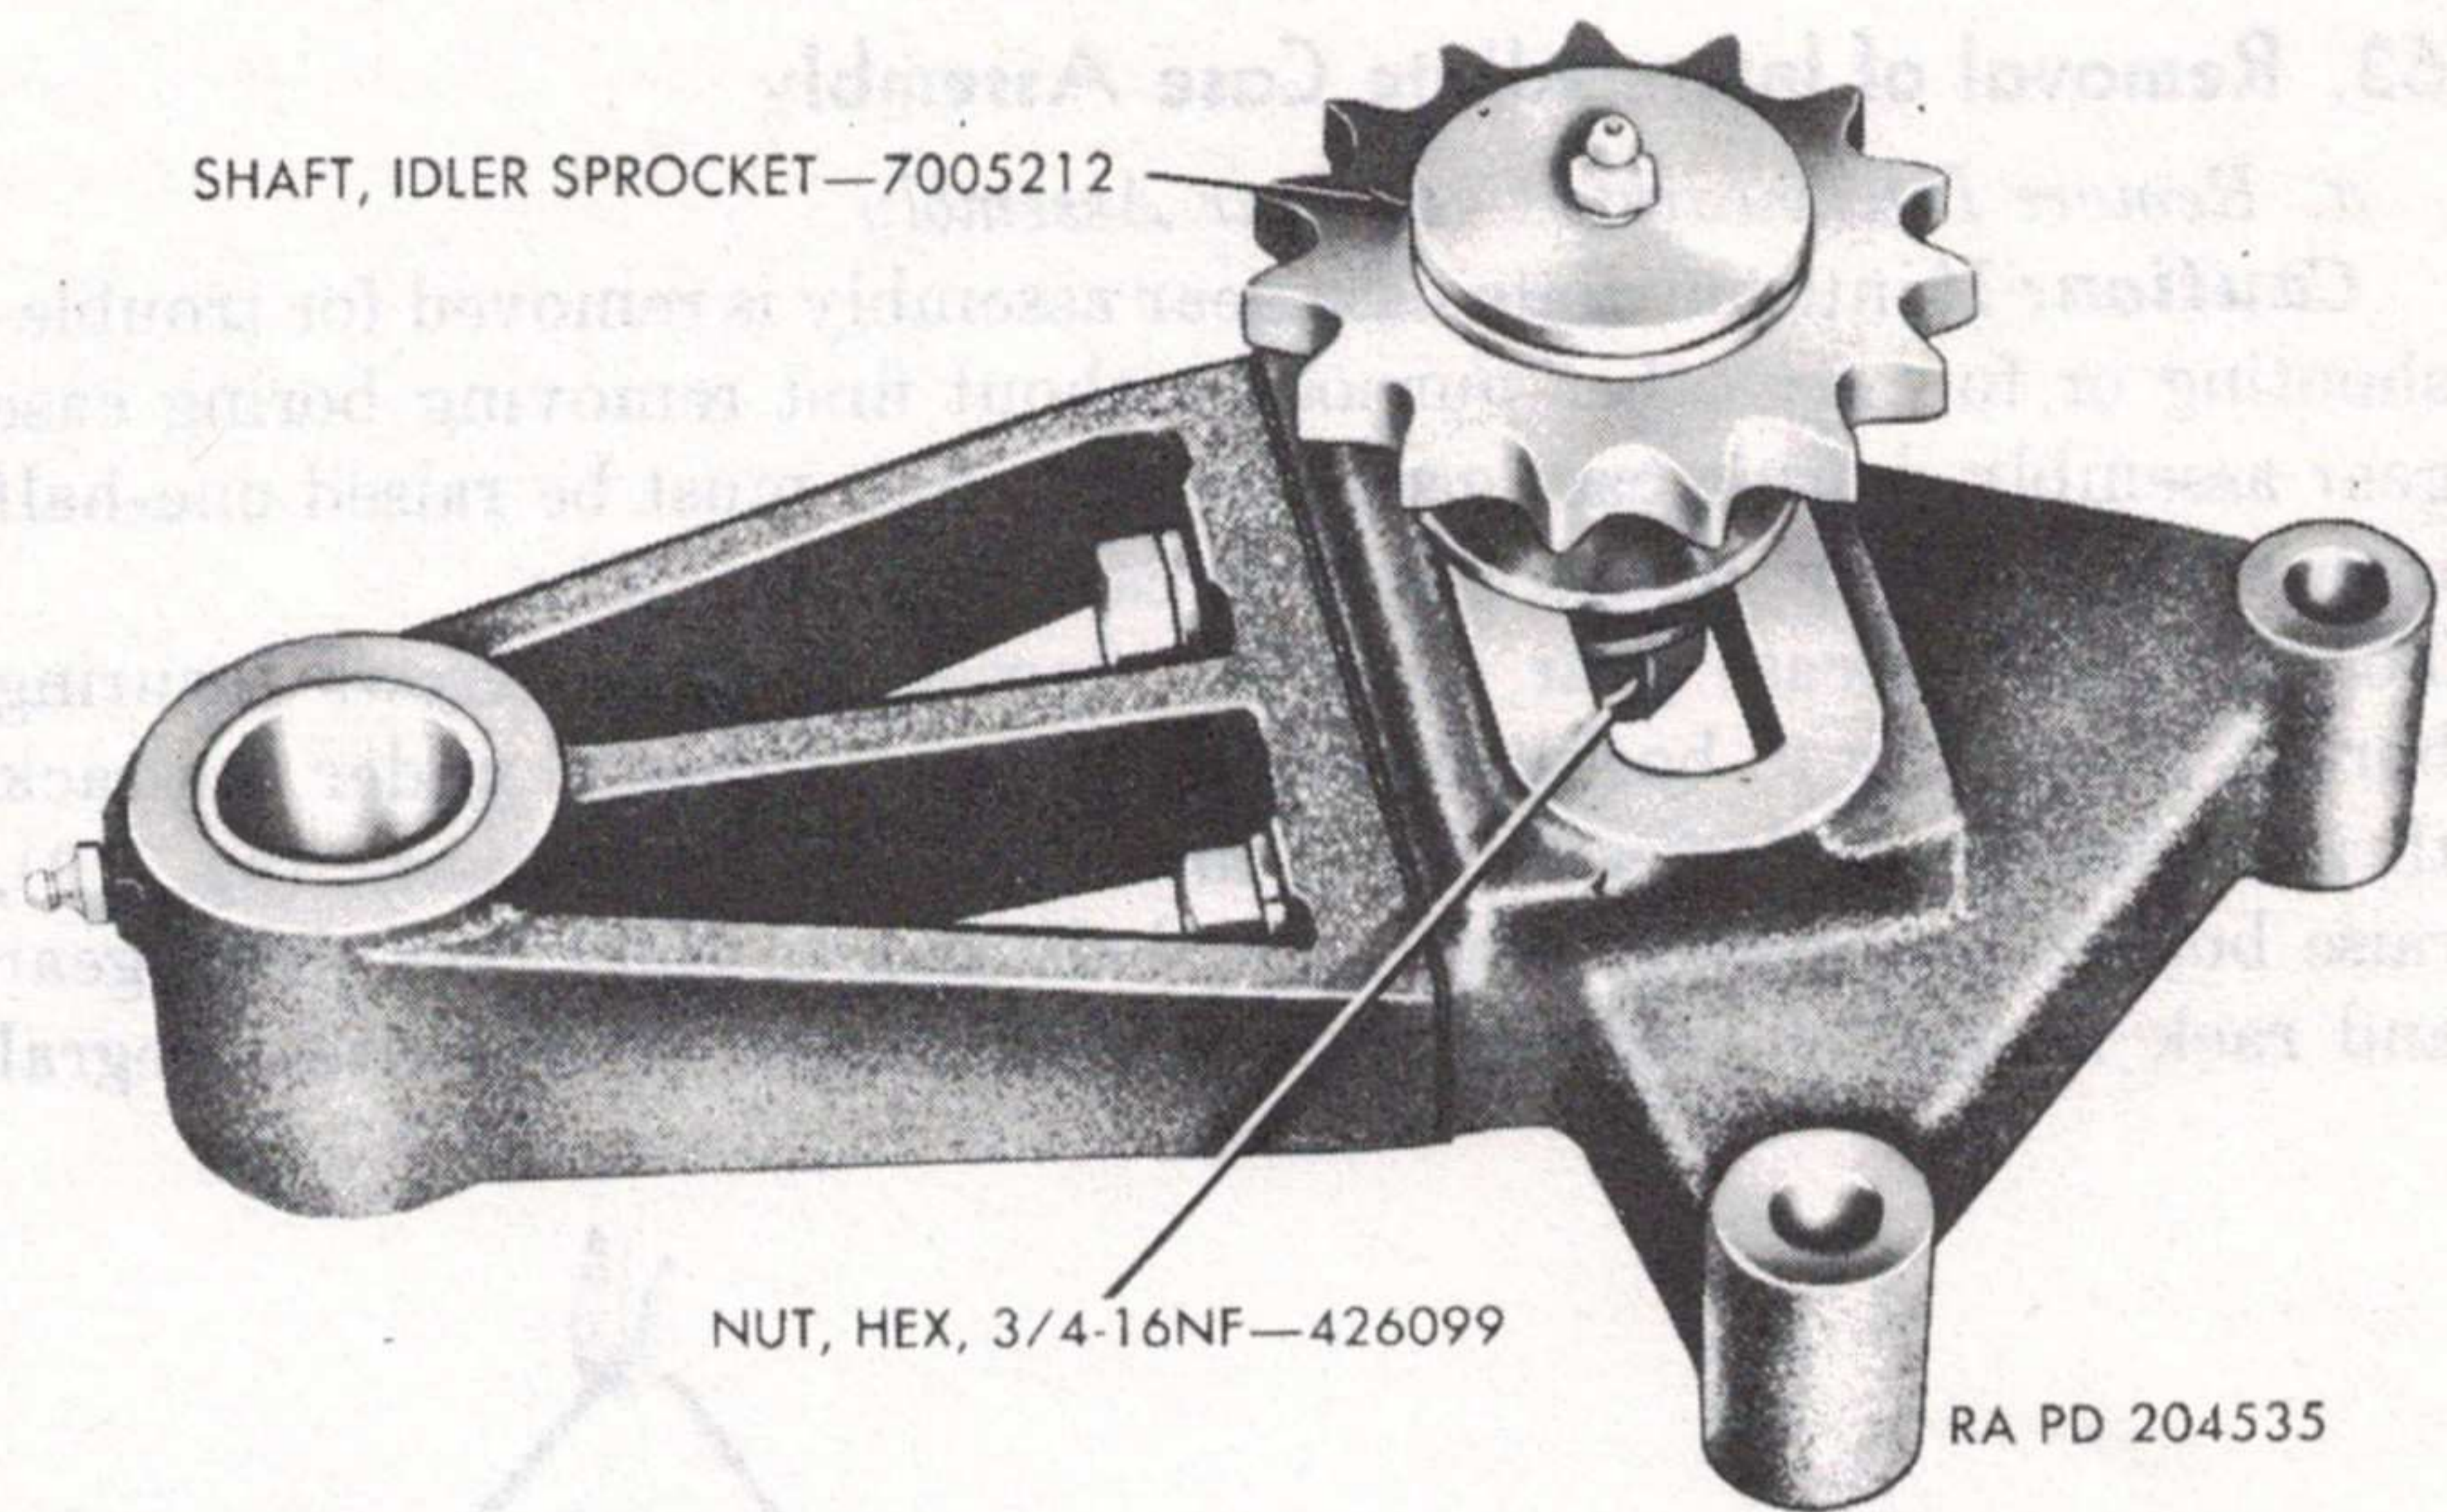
Idler sprocket assembly with vertical leveling worm shaft support attached.
